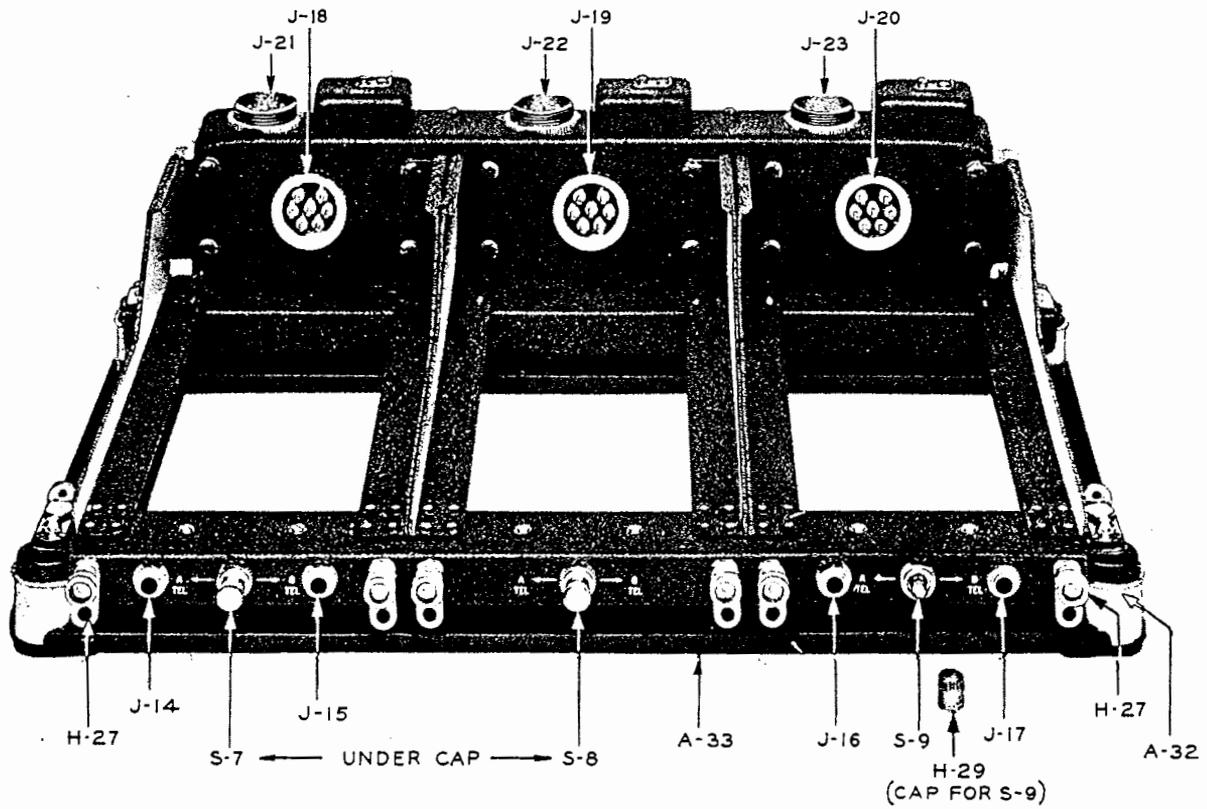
A—RACK FT-220-A AND MOUNTING FT-221-A, FRONT VIEW
